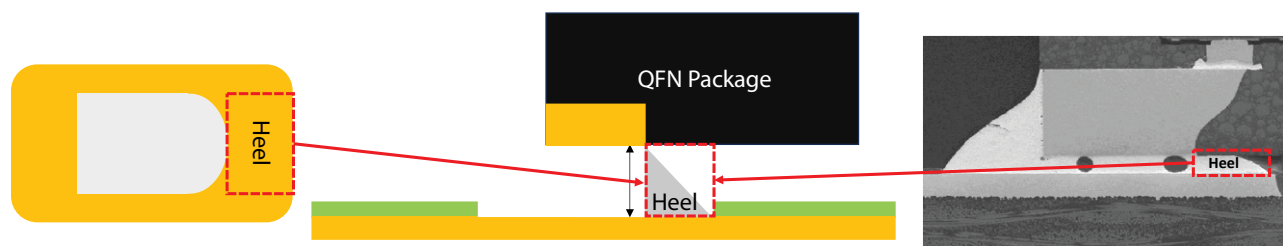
Illustration of the impact of the solder at the heel on stand-off height
